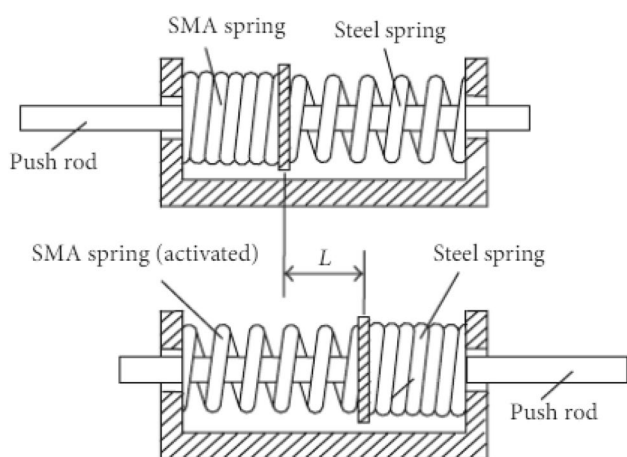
Concept with a SMA spring [12]. Top: SMA spring is in its initial state and gets compressed by the steel spring. Bottom: when activating (heating) the SMA spring its spring force exceeds the force of the steel spring and compresses it
